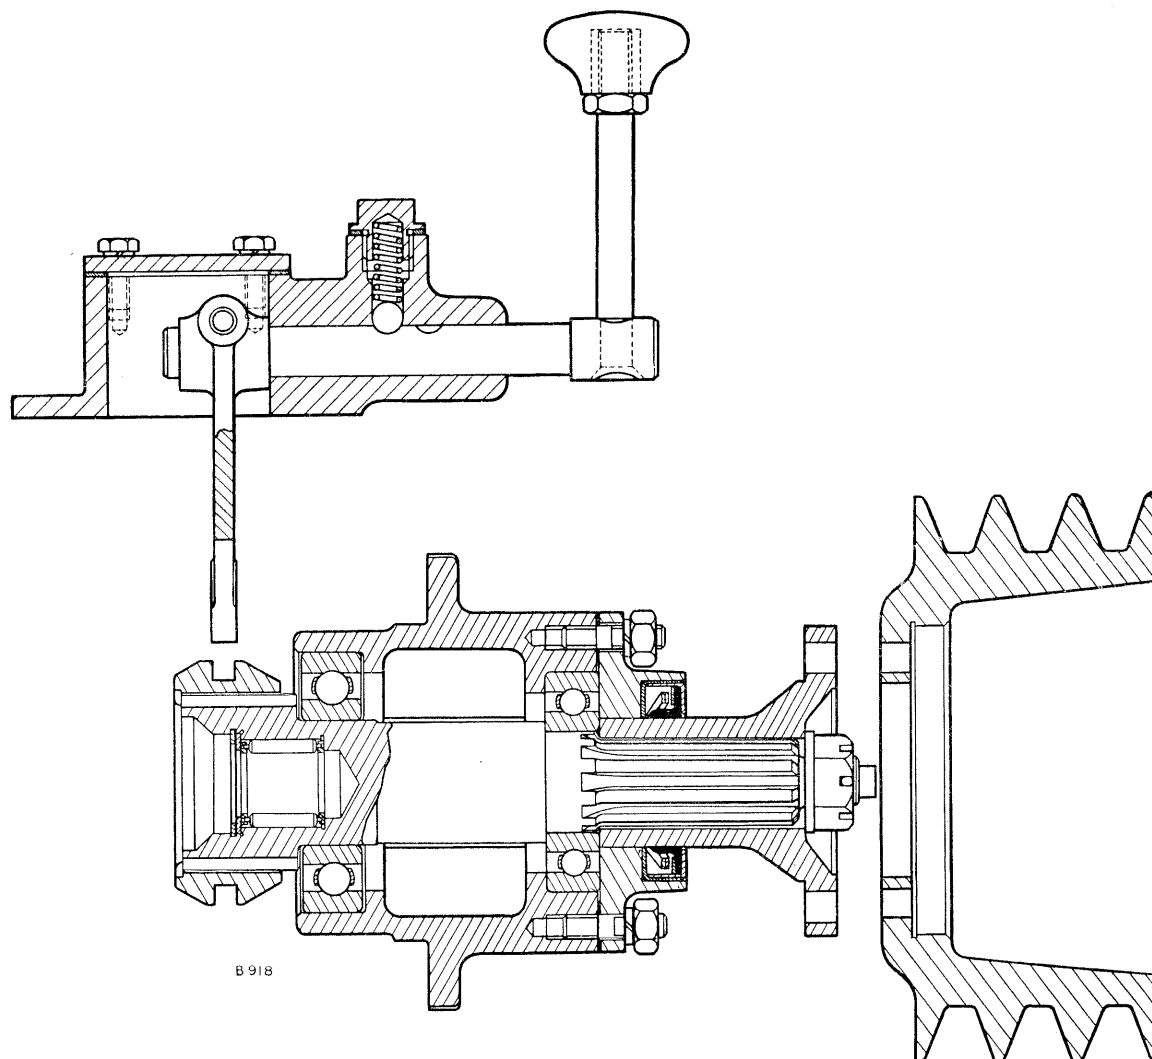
Cross-section of gearbox drive unit and centre pulley, (early type illustrated)
